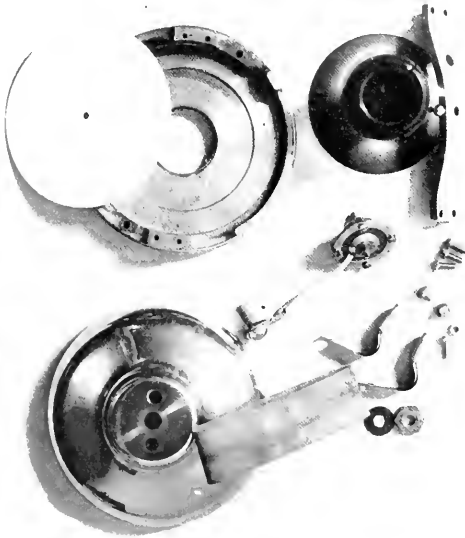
INTENSIFYING TRANSMITTER DISSECTED.
